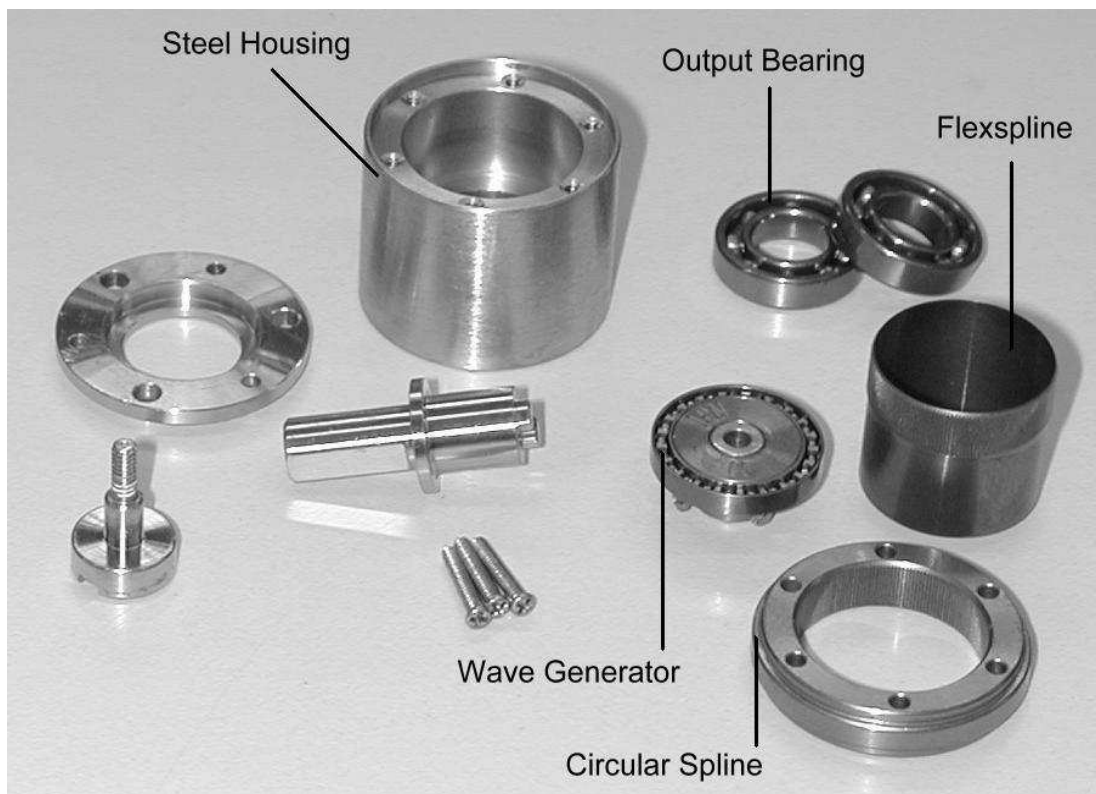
Disassembled Harmonic Drive gear coated with tungsten disulphide.
